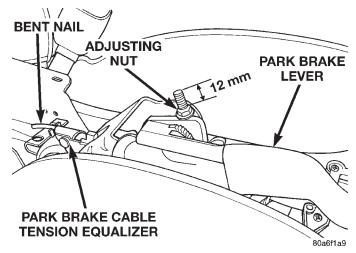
Parking Brake Adjustment (Rear Drum Brakes)
